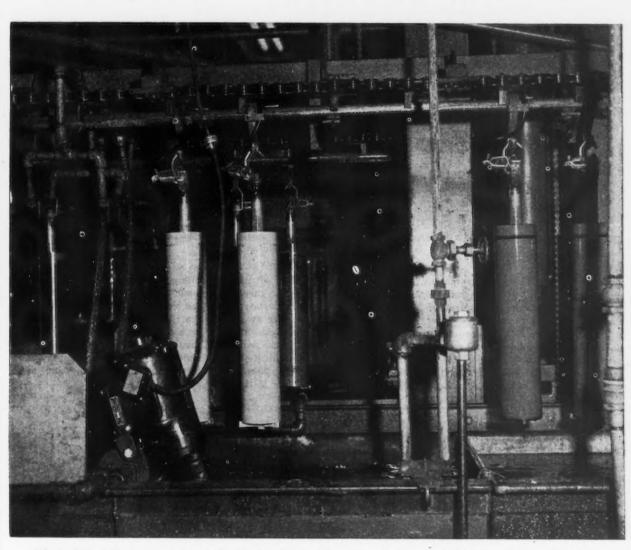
Part of the conveyor setup at the Chrysler plant in Detroit for zinc plating and Iriditing rockets in a single line.
